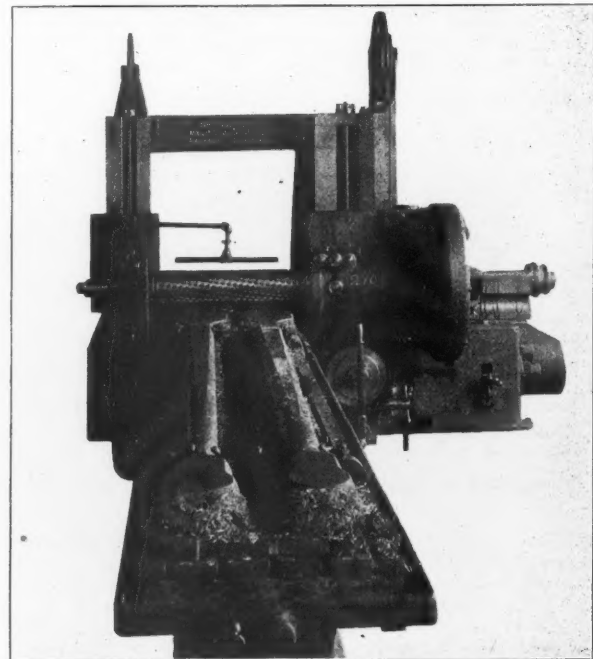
The Ingersoll 36-in. x 16-ft. Milling Machine.
